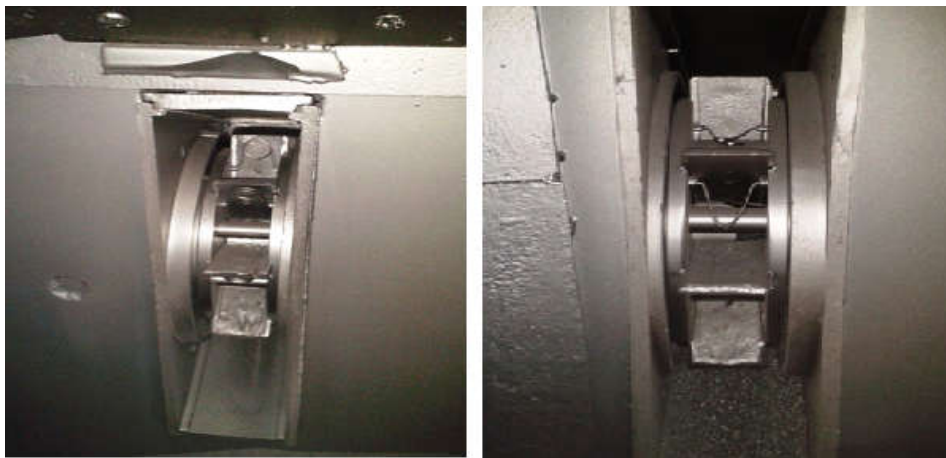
Blast impellers of the abrasive blasting machine in the subject plant
